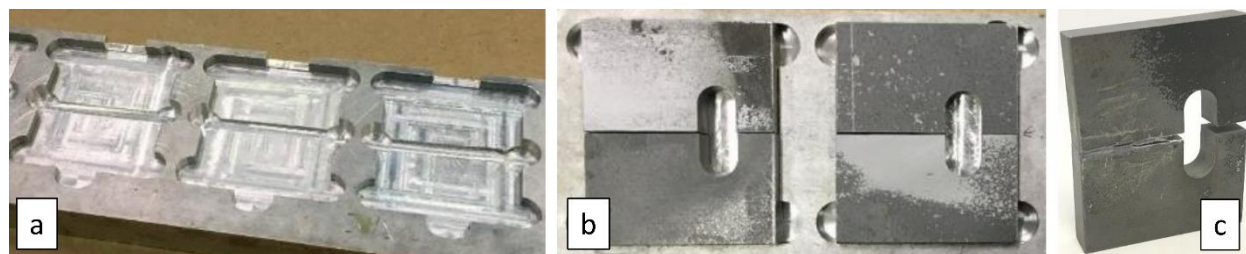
t sample bonding fixture (a); samples in place for curing (b); sample after testing (c)
